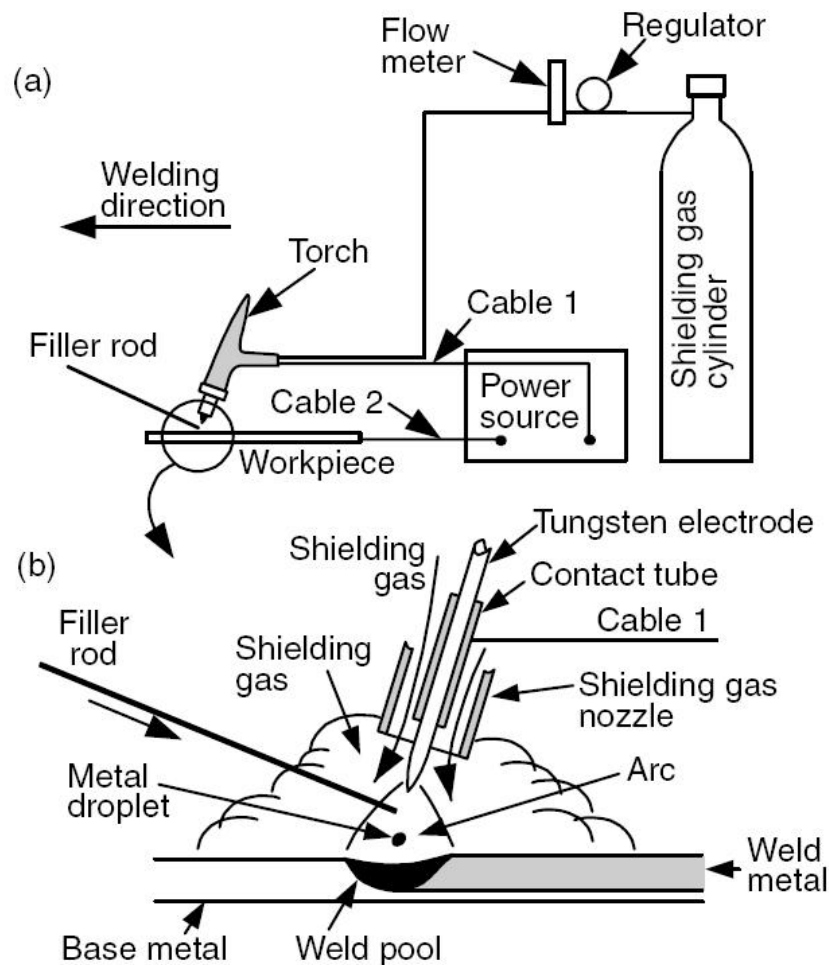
Gas Tungsten Arc Welding Process a) Overall Process and b) Welding area [6]
